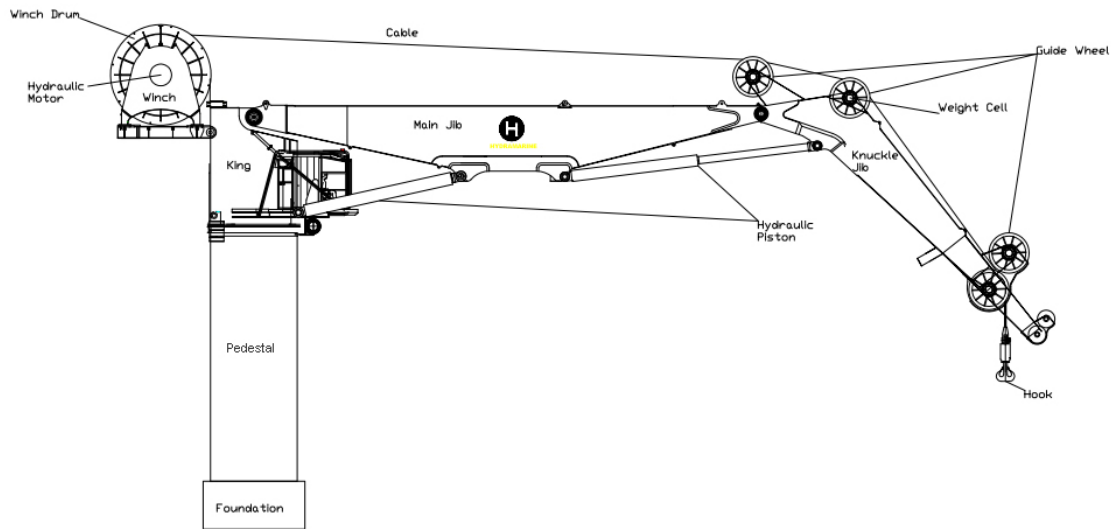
Drawing of the knuckle jib crane (Skagestad et al., 2008).
